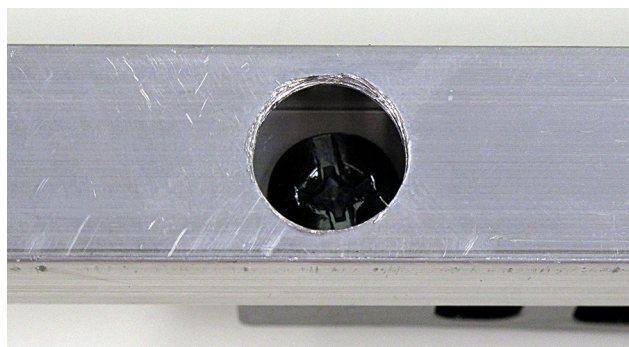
Close up of the bottom of the aluminum tubing after mounting holes are drilled for screws.
